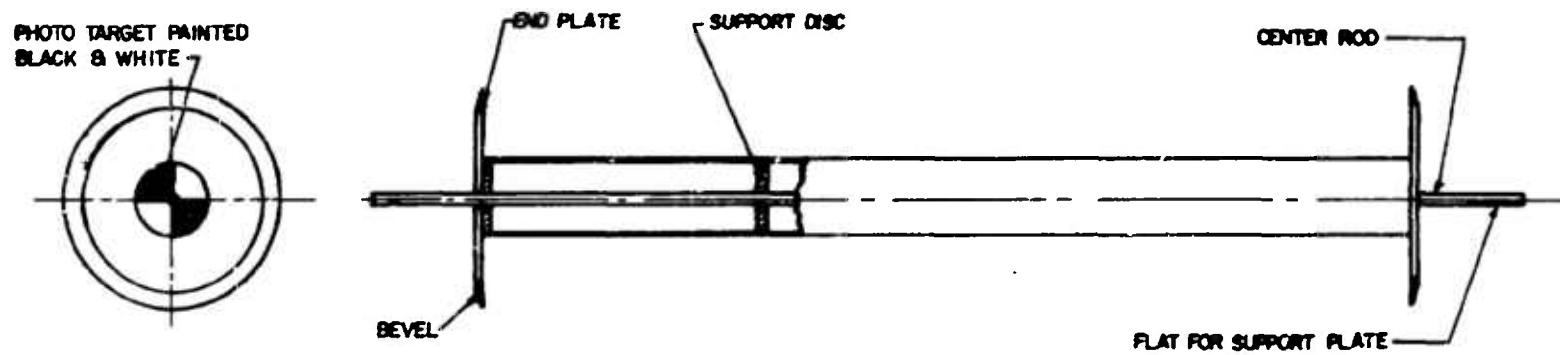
MECHANICAL DESIGN OF TYPICAL CYLINDER
